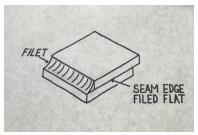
Ten different solder types were tested. The solder was exposed at a seam and a fillet.
